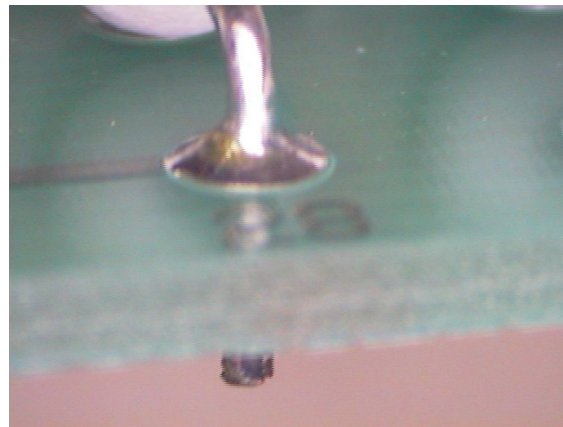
Example of a successful solder joint, seen from the flowed fillet of the circuit board (Eutectic flux cored solder, joint F28).
